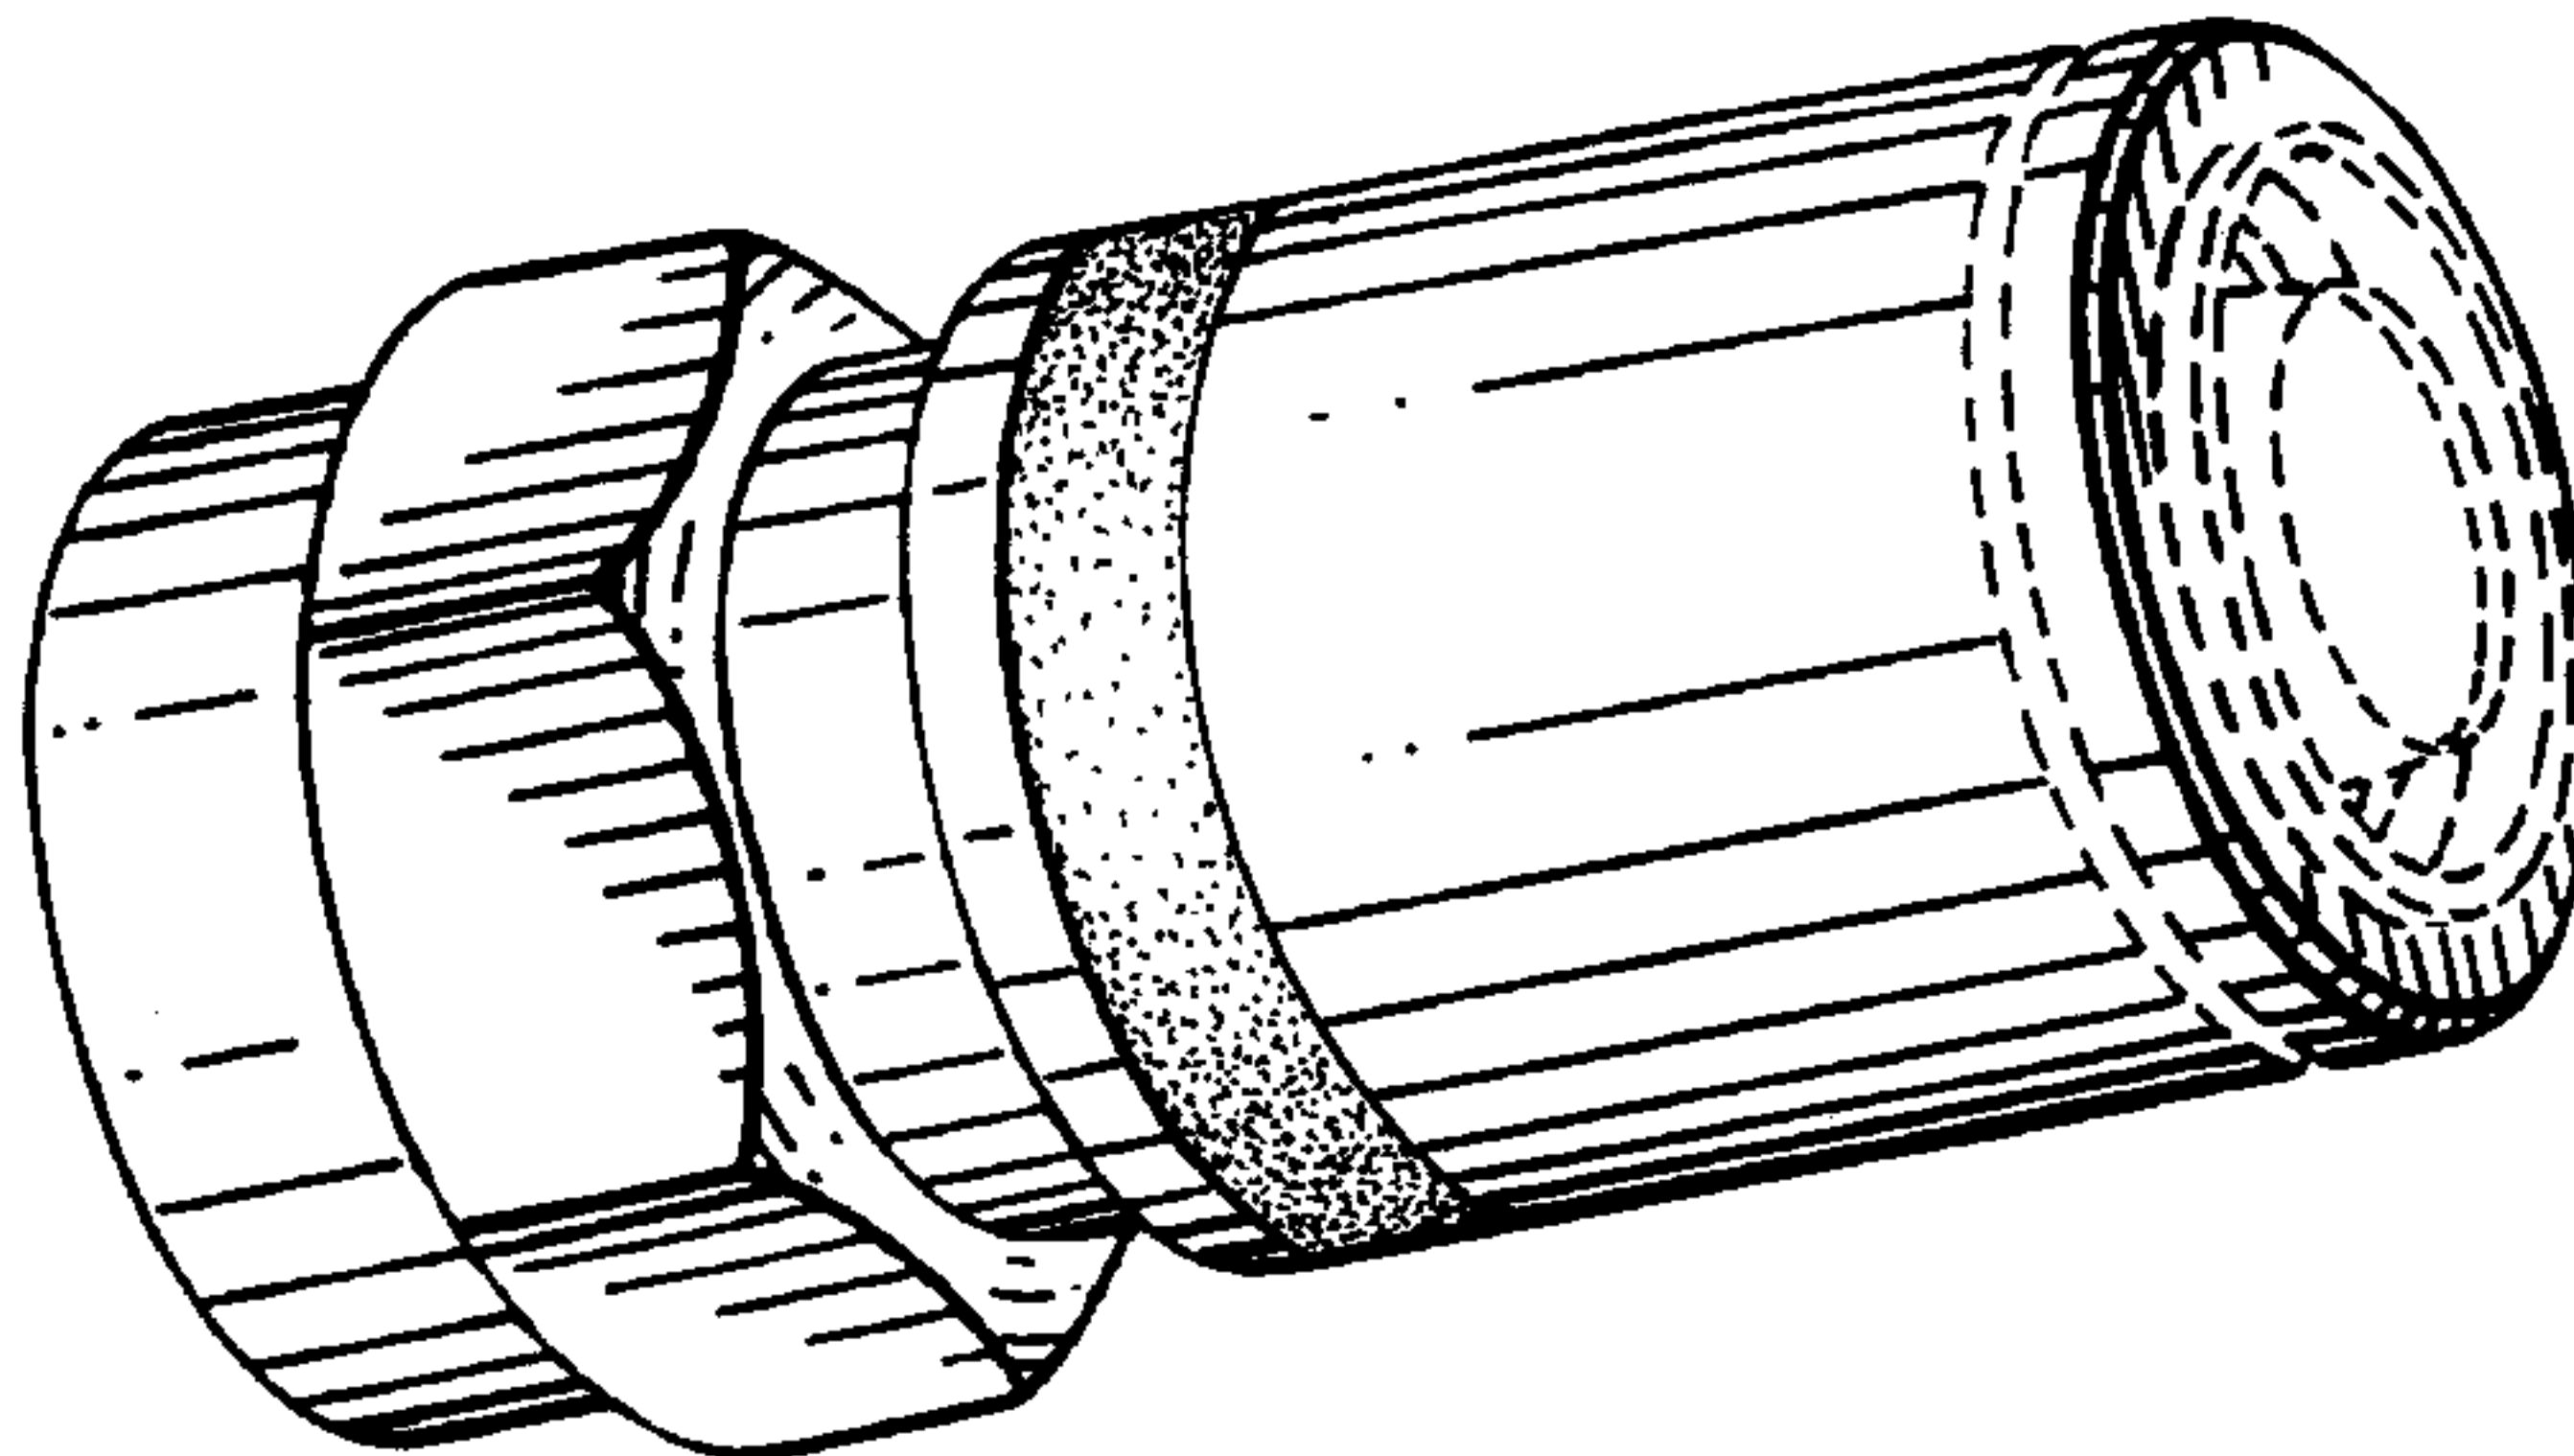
is a perspective view of a closed compression-type coaxial cable connector according to the present invention; FIG. 2 is a side view thereof, all other side views being a mirror image thereof;
